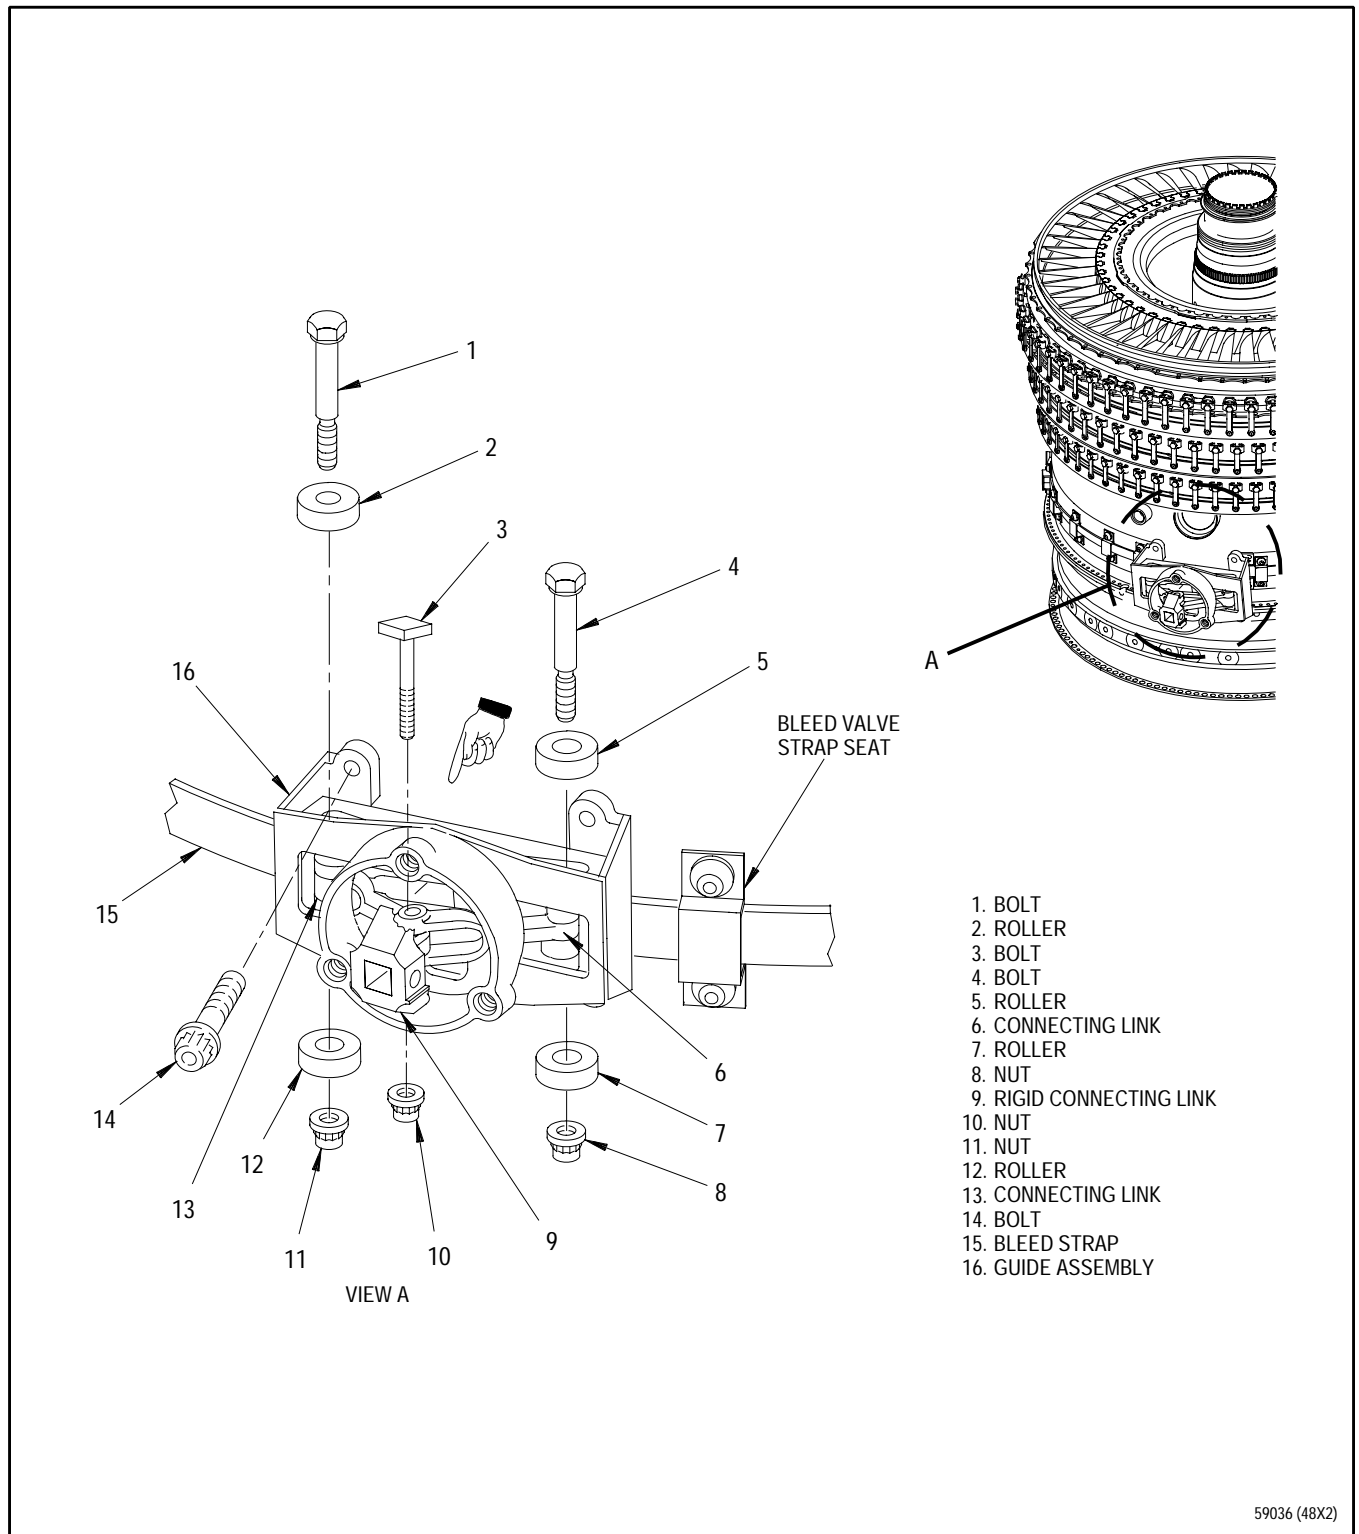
Bleed Valve Strap and Actuating Linkage - Removal
